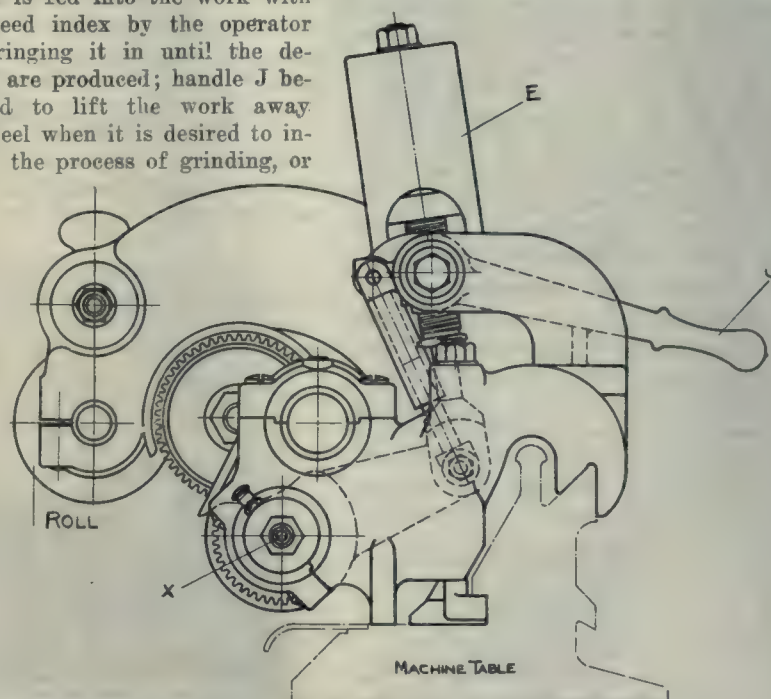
END VIEW OF ATTACHMENT IN DETAIL.
